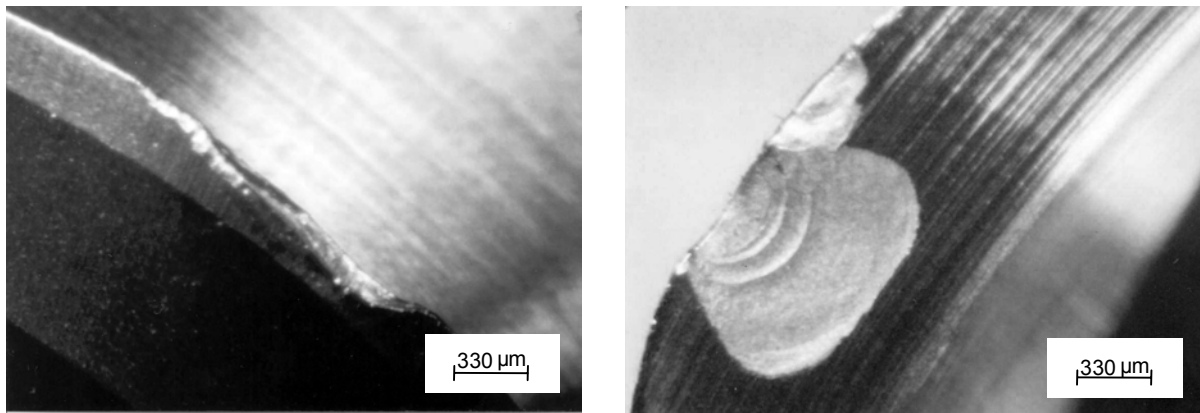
Flank and face of P10/M10 tool after 150 min of cut.
